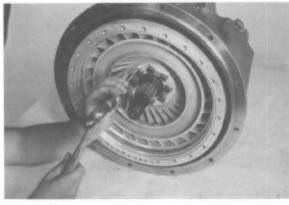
Straighten corner of impeller to hub screw lock tabs. Remove impeller hub bolts and lock tabs.
